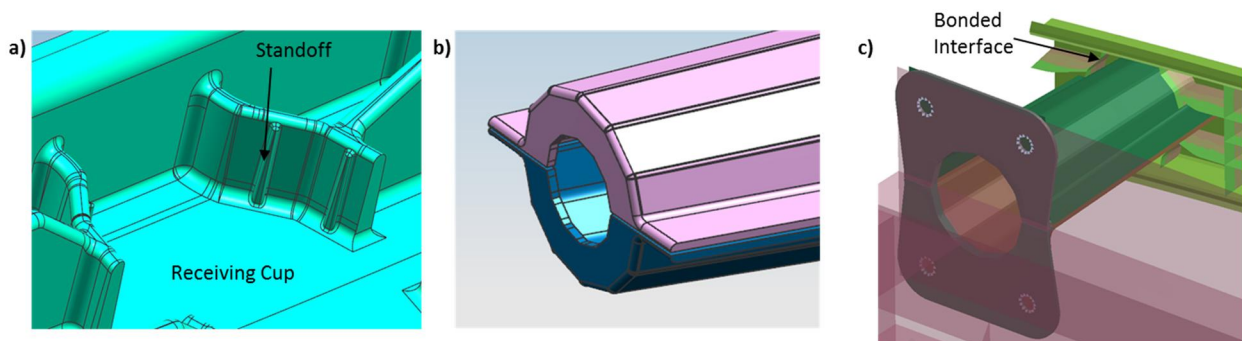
Details of the bonded interface for the bumper beam and crush can. a) Zoom-in of the receiving cup in the bumper beam and the standoffs. b) Zoom-in of the assembled crush can. c) Schematic of the assembled bumper beam and crush can, indicating the location of the bonded interface. No rivets are used at this interface.
